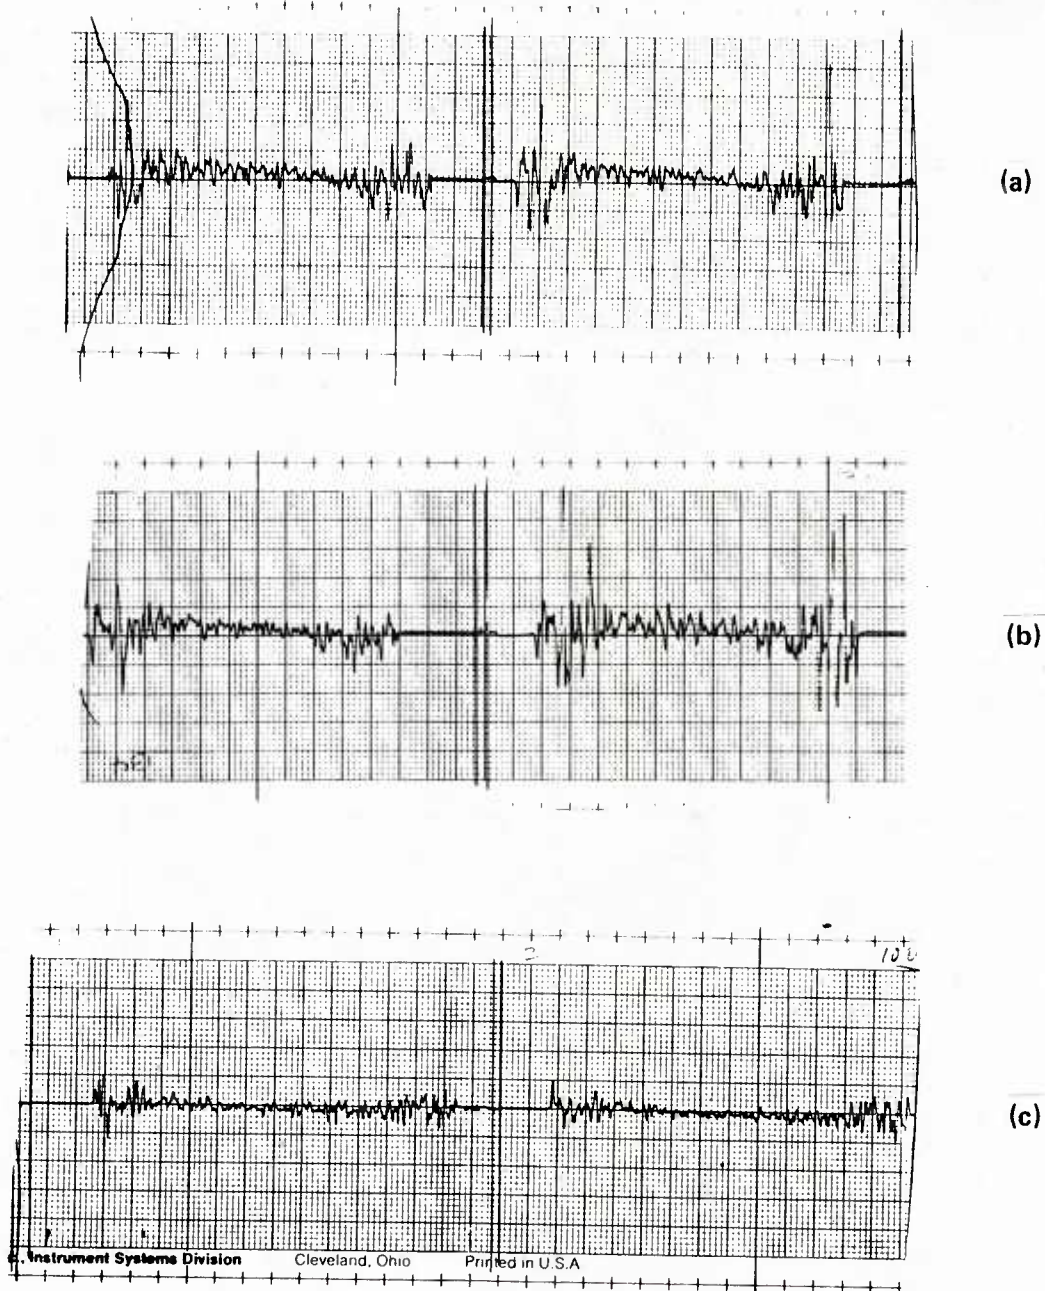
Eddy Current Bolt Hole Scans in the Cast Specimens; (a) Specimen No. 110, (b) Specimen No. 134, and (c) Specimen No. 100
